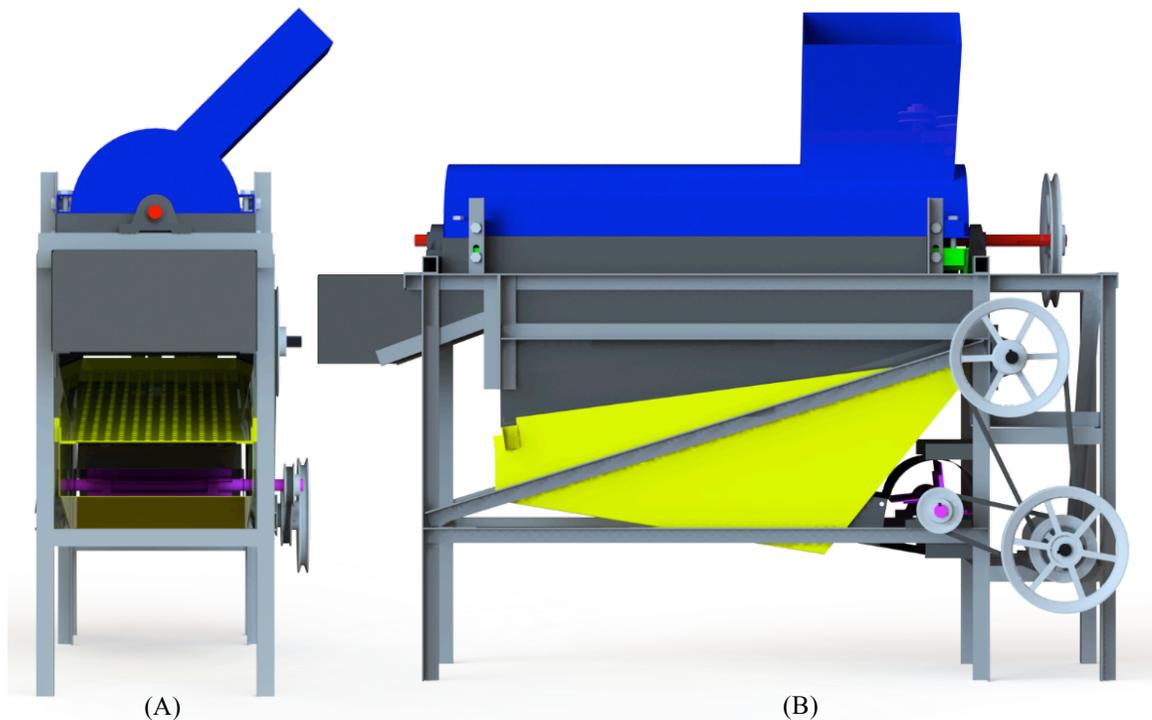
A rendering of (A) the end view and (B) side view of the final thresher design. Source: Author.
